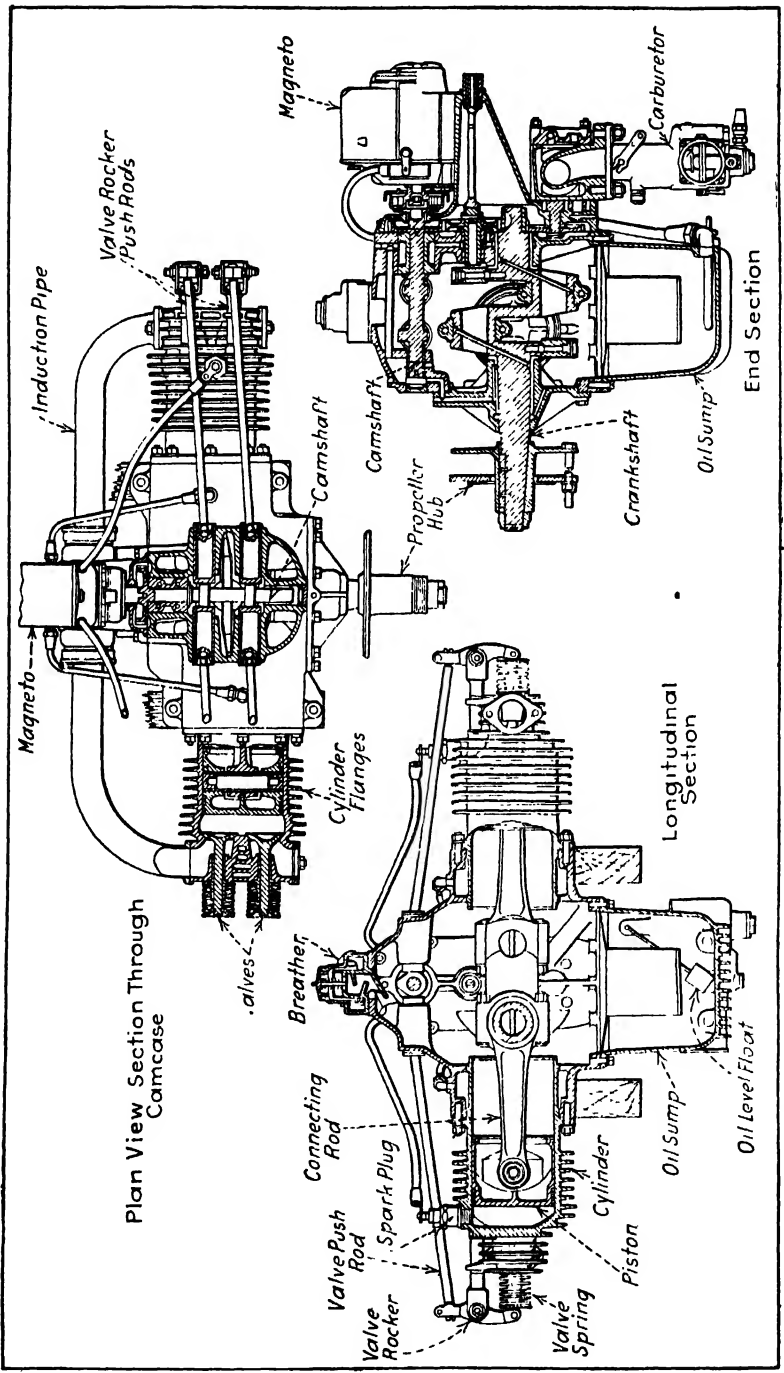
Sectional Drawings Showing Construction of Wright-Morehouse Aviation Engine, with all Important Parts Designated for Easy Reference.
